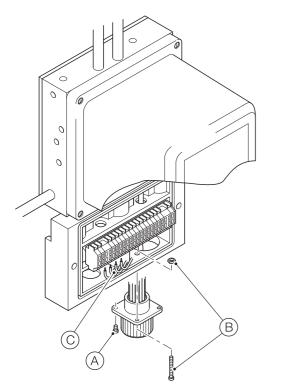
Removing the cable connector and terminal block wires (outgoing)
